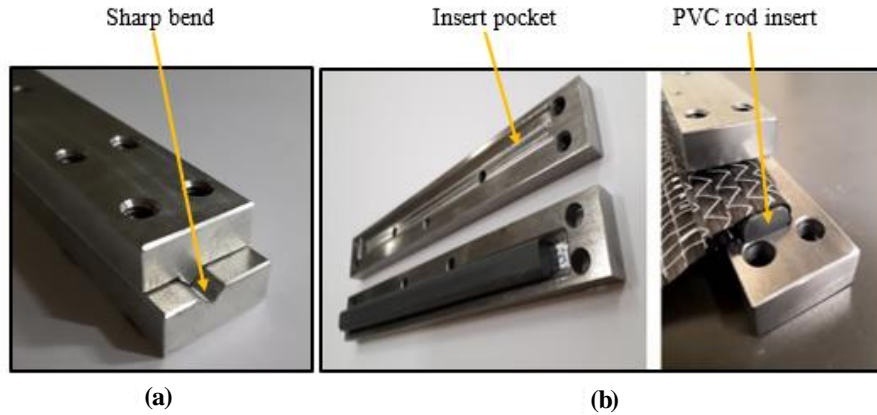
UD-NCF extension test fabric clamps: (a) original clamp design, and (b) redesigned clamping fixture with a PVC insert.
